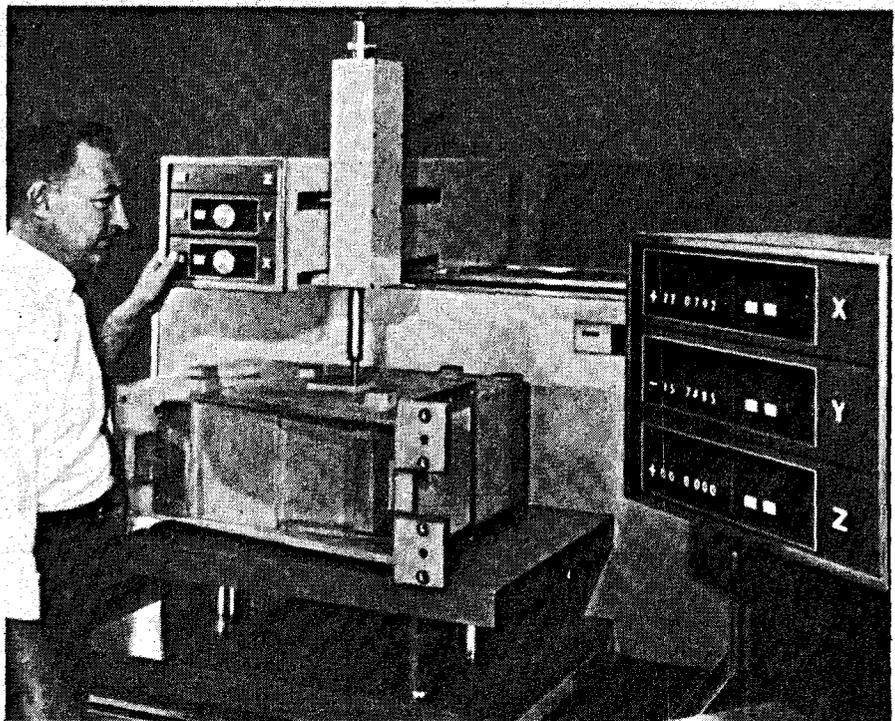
The Sheffield "Cordax" measuring machine being used to inspect the critical dimensions of a machined part.
